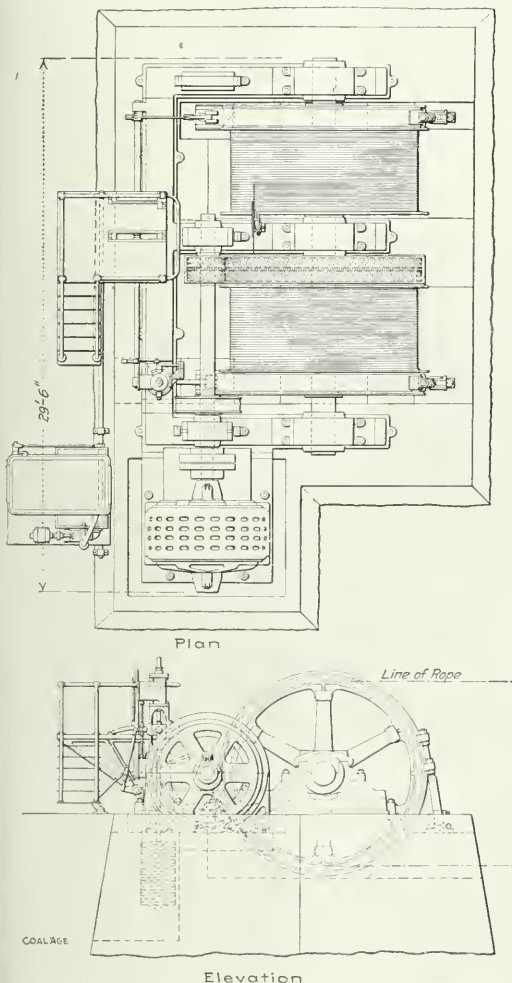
PLAN AND ELEVATION OF HOIST AND MOTOR
